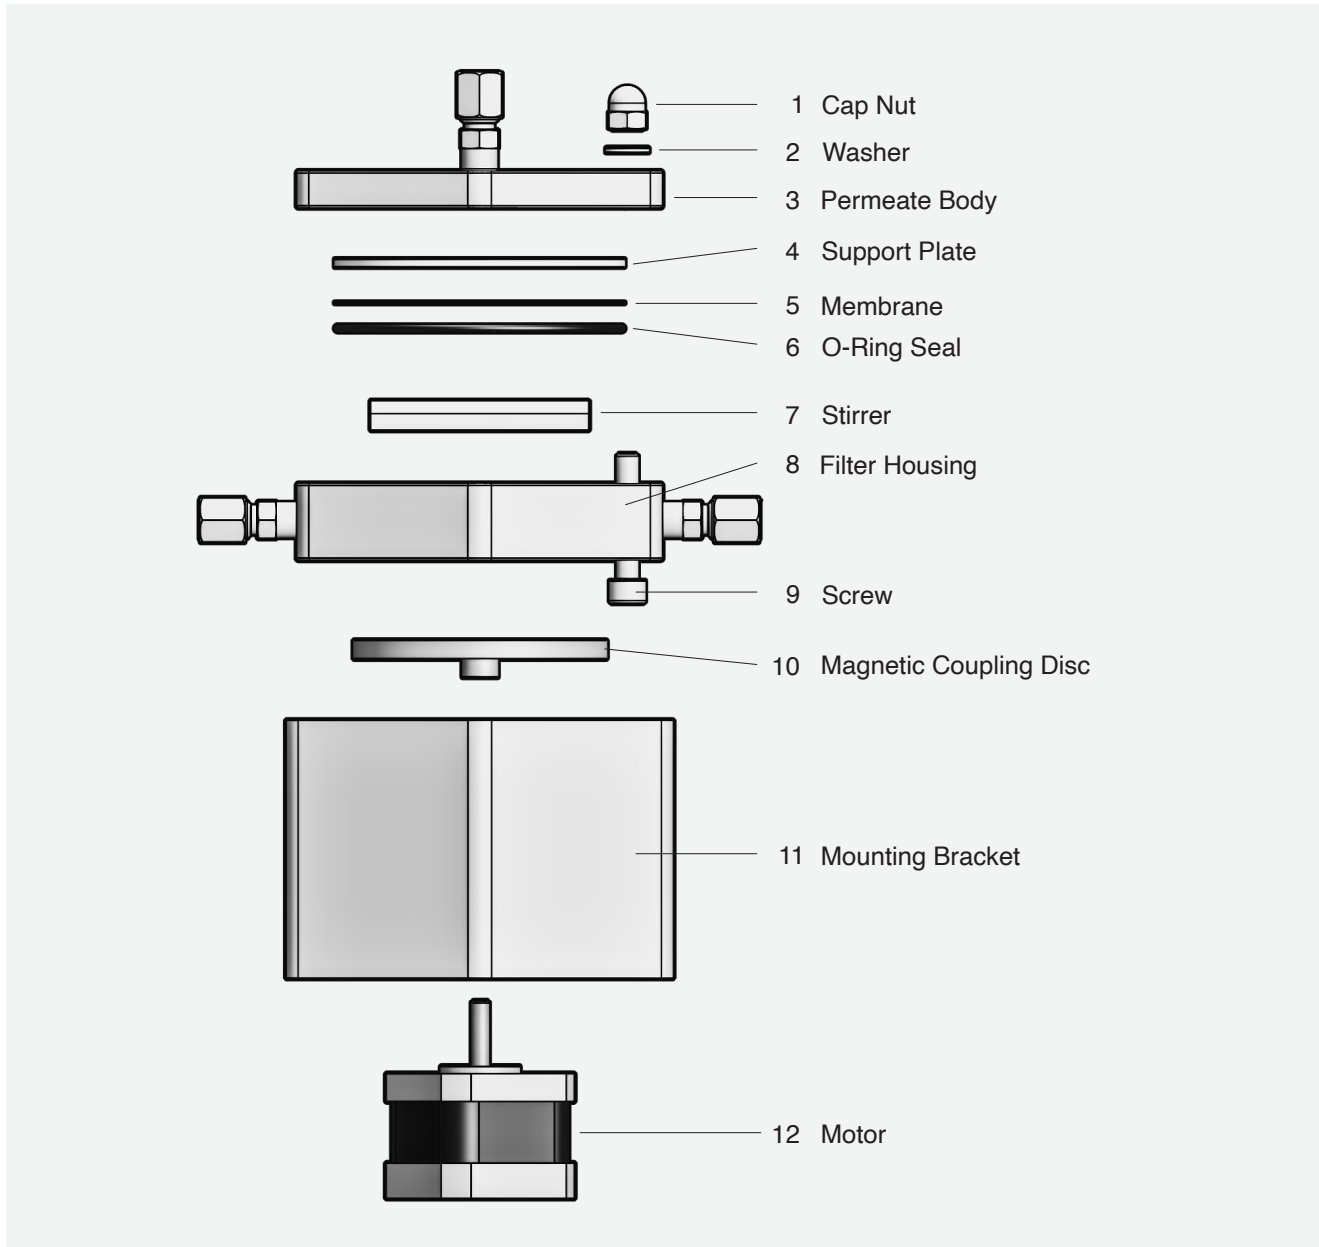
HEXAMEM assembly, including mounting bracket with motor
